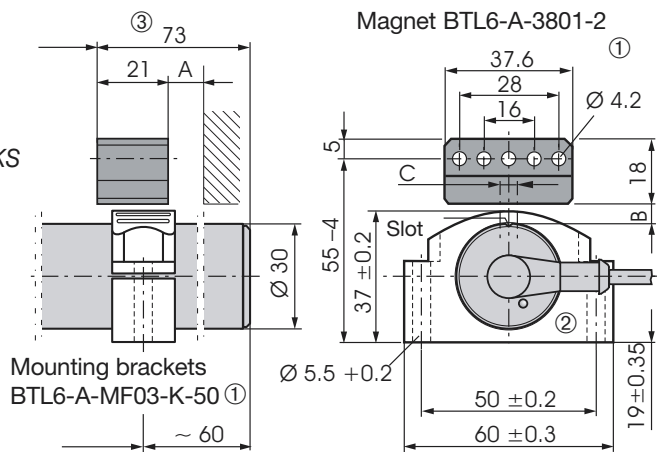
Dimensional drawing (BTL6...A1-S115 transducer with floating magnet BTL6-A-3801-2, mounting brackets BTL6-A-MF03-K-50 and BKS-S116)
